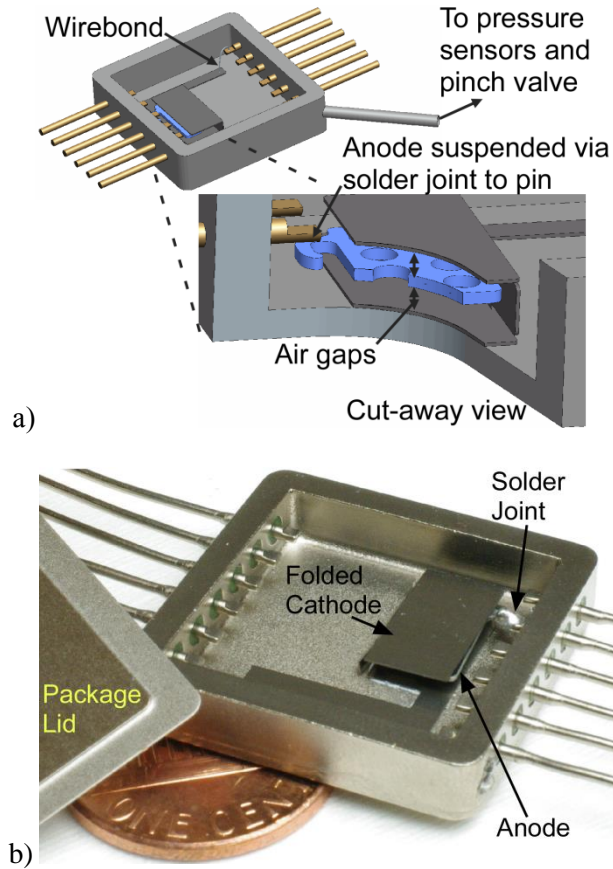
a) In a preliminary test structure, the anode is suspended within a single folded cathode by rigidly fixing the anode to a package pin. b) An assembled preliminary test structure, prior to wirebonding, inside a commercial power electronics package (Sinclair Manufacturing).
